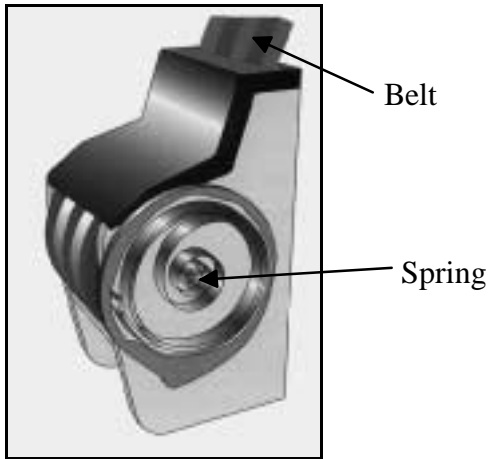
Wide coil spring in recoil mechanism inside housing at fixed end of seat belt
